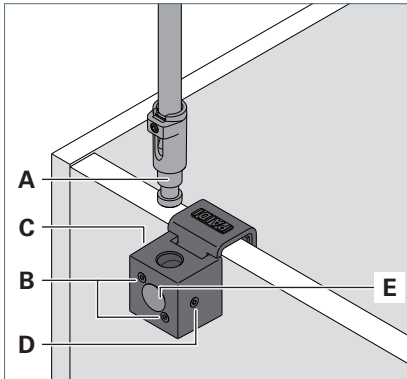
Mounting the luminaire to a vertical mounting surface.
